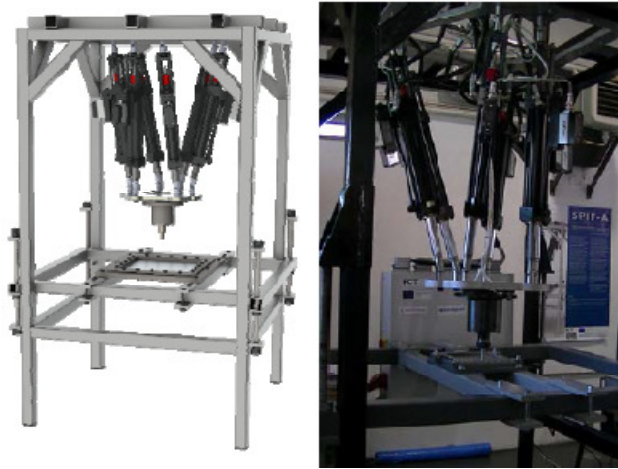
CAD model (left) and built machine (right) of SPIF-A. Alves de Sousa *et al.*, 2014
